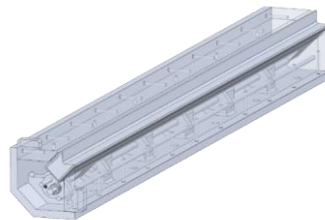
Rail Configured Clamping Mechanism Sub-Assembly
